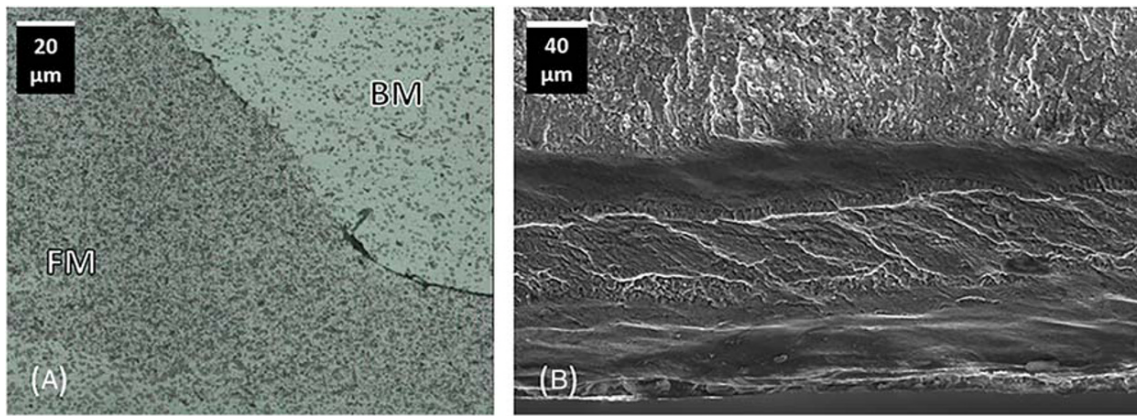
High-magnification assembly images of (A) the bond line in the root region on the retreating side of the joint and (B) the dim fracture surface appearance of a broken extrusion zone specimen associated with the ‘kissing’ bond formation in the same region. BM, base metal; FM, filler metal [Colour figure can be viewed at wileyonlinelibrary.com]
